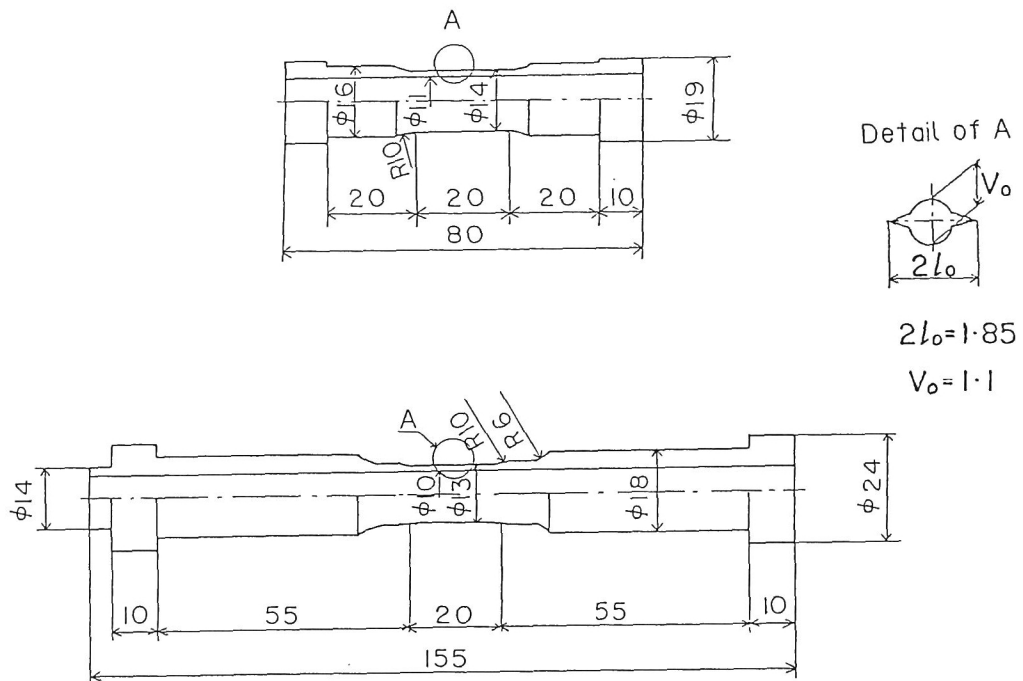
Shape and size of specimens. Dimensions are in mm.
